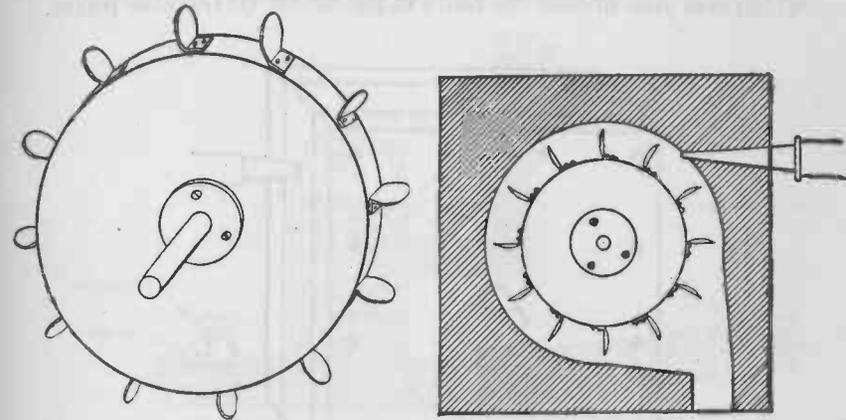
The completed wheel with the buckets and shaft in place is shown at the left. Alongside it is the motor with one side piece removed to show the position of the wheel and the nozzle.
